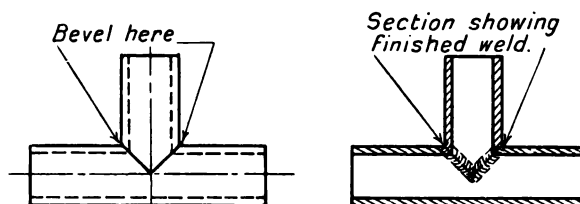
Showing construction of T pipe, bevel and weld.
